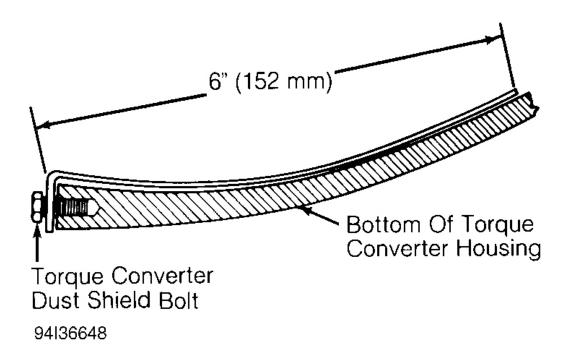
Fabricating Leakage Test Probe Courtesy of CHRYSLER LLC
